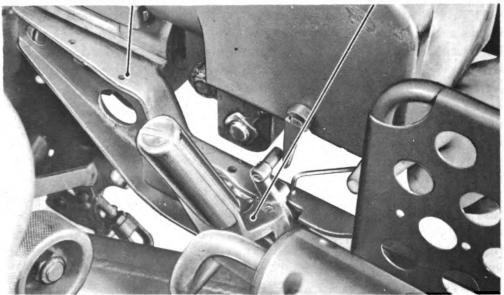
Removing the Set Screw from Firing Lever Assembly
